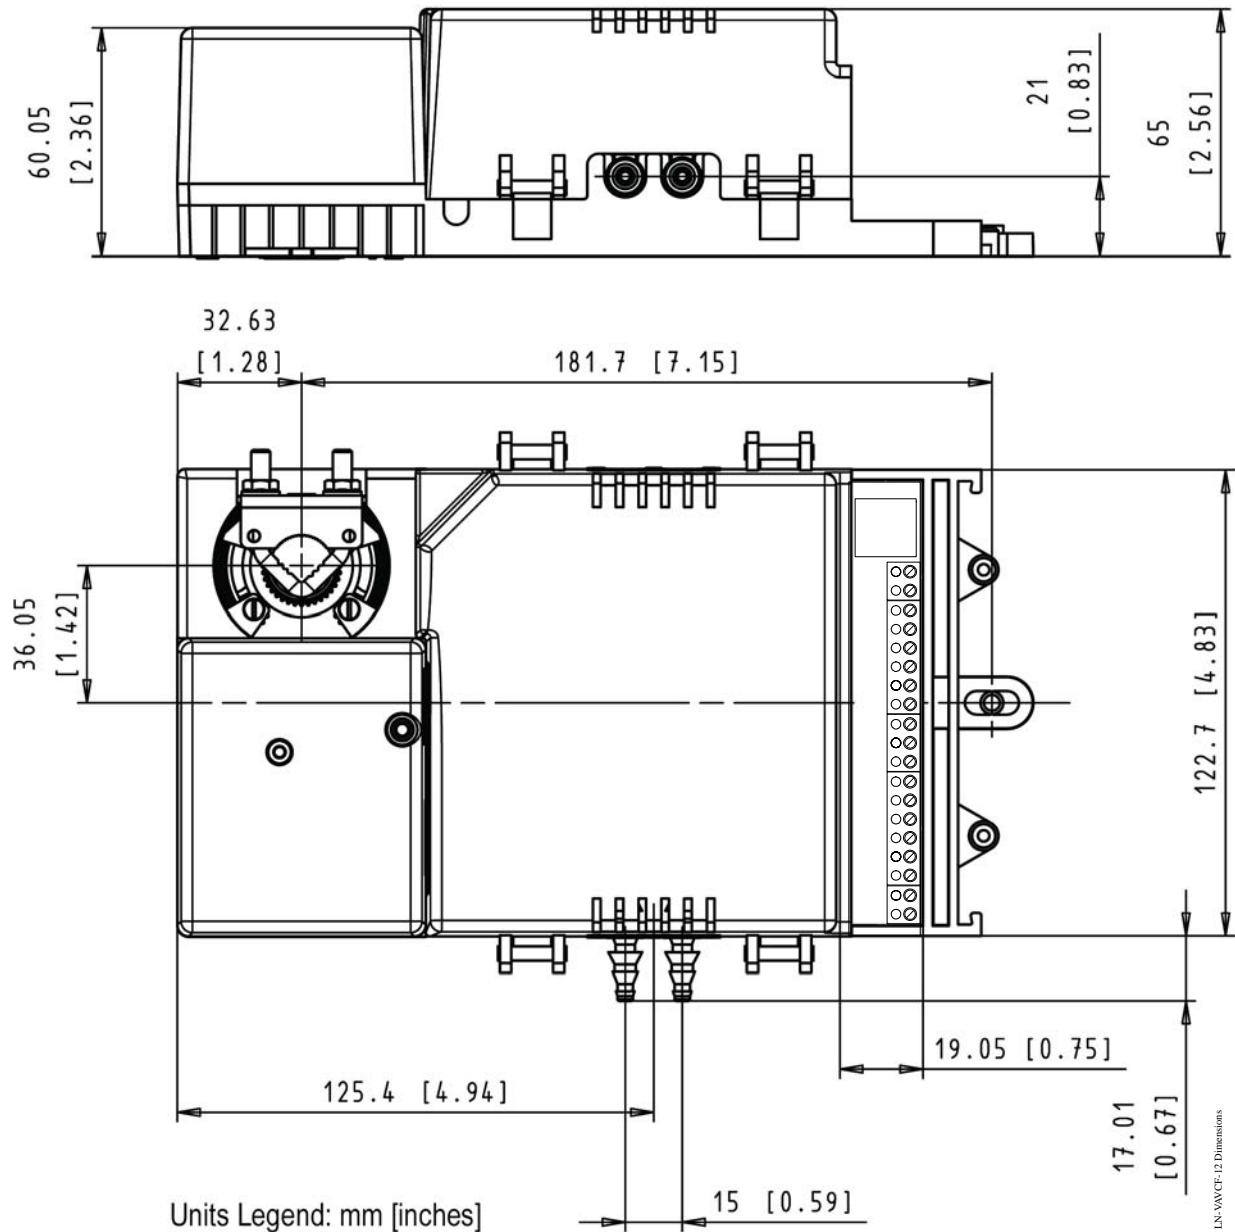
LN-VAVCF-12 Dimensions, mm (in.)
